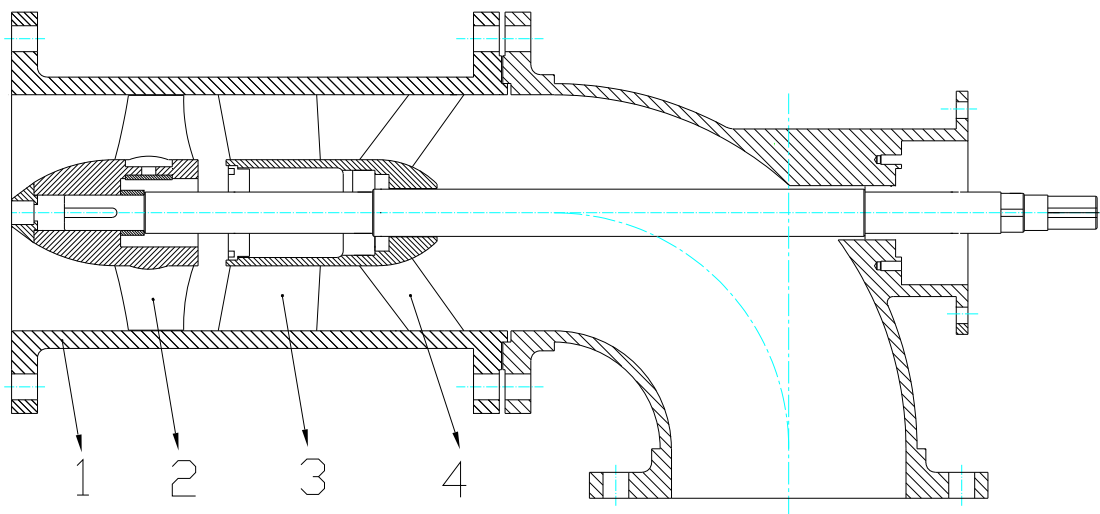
Two-dimensional diagram of the axial-flow pump. 1. Pipe 2. Impeller 3. Guide vane 4. Guide vane support plate.
